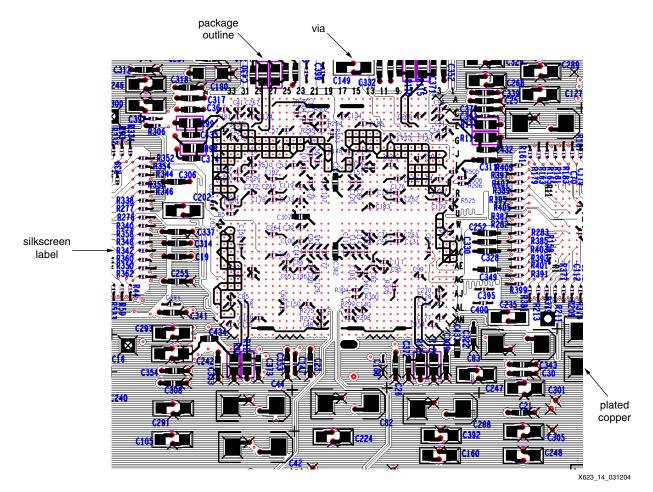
Example PCB Layout showing Capacitor Placement on the Bottom Surface
